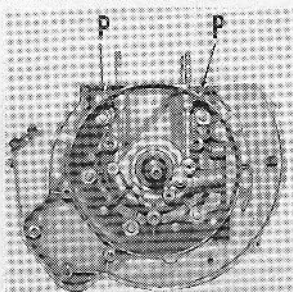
A—Drive tapered pins (P) out before separating crankcase halves.
